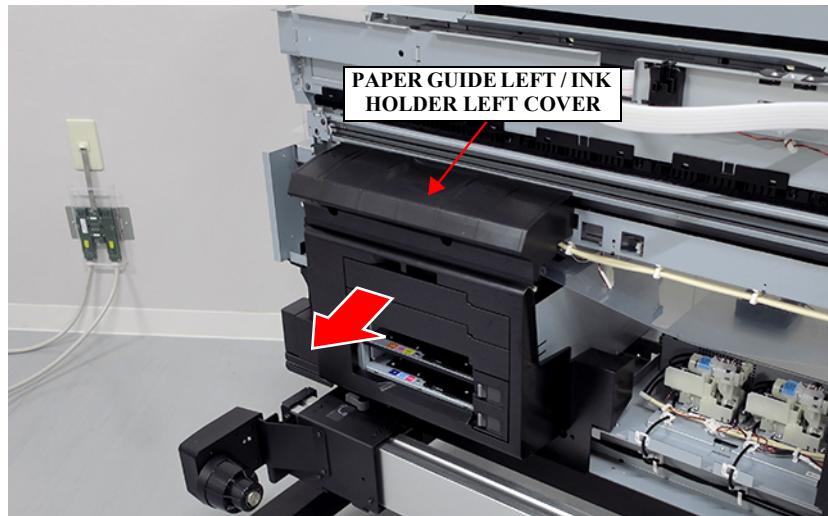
Removing the PAPER GUIDE LEFT / INK HOLDER LEFT COVER (2)
